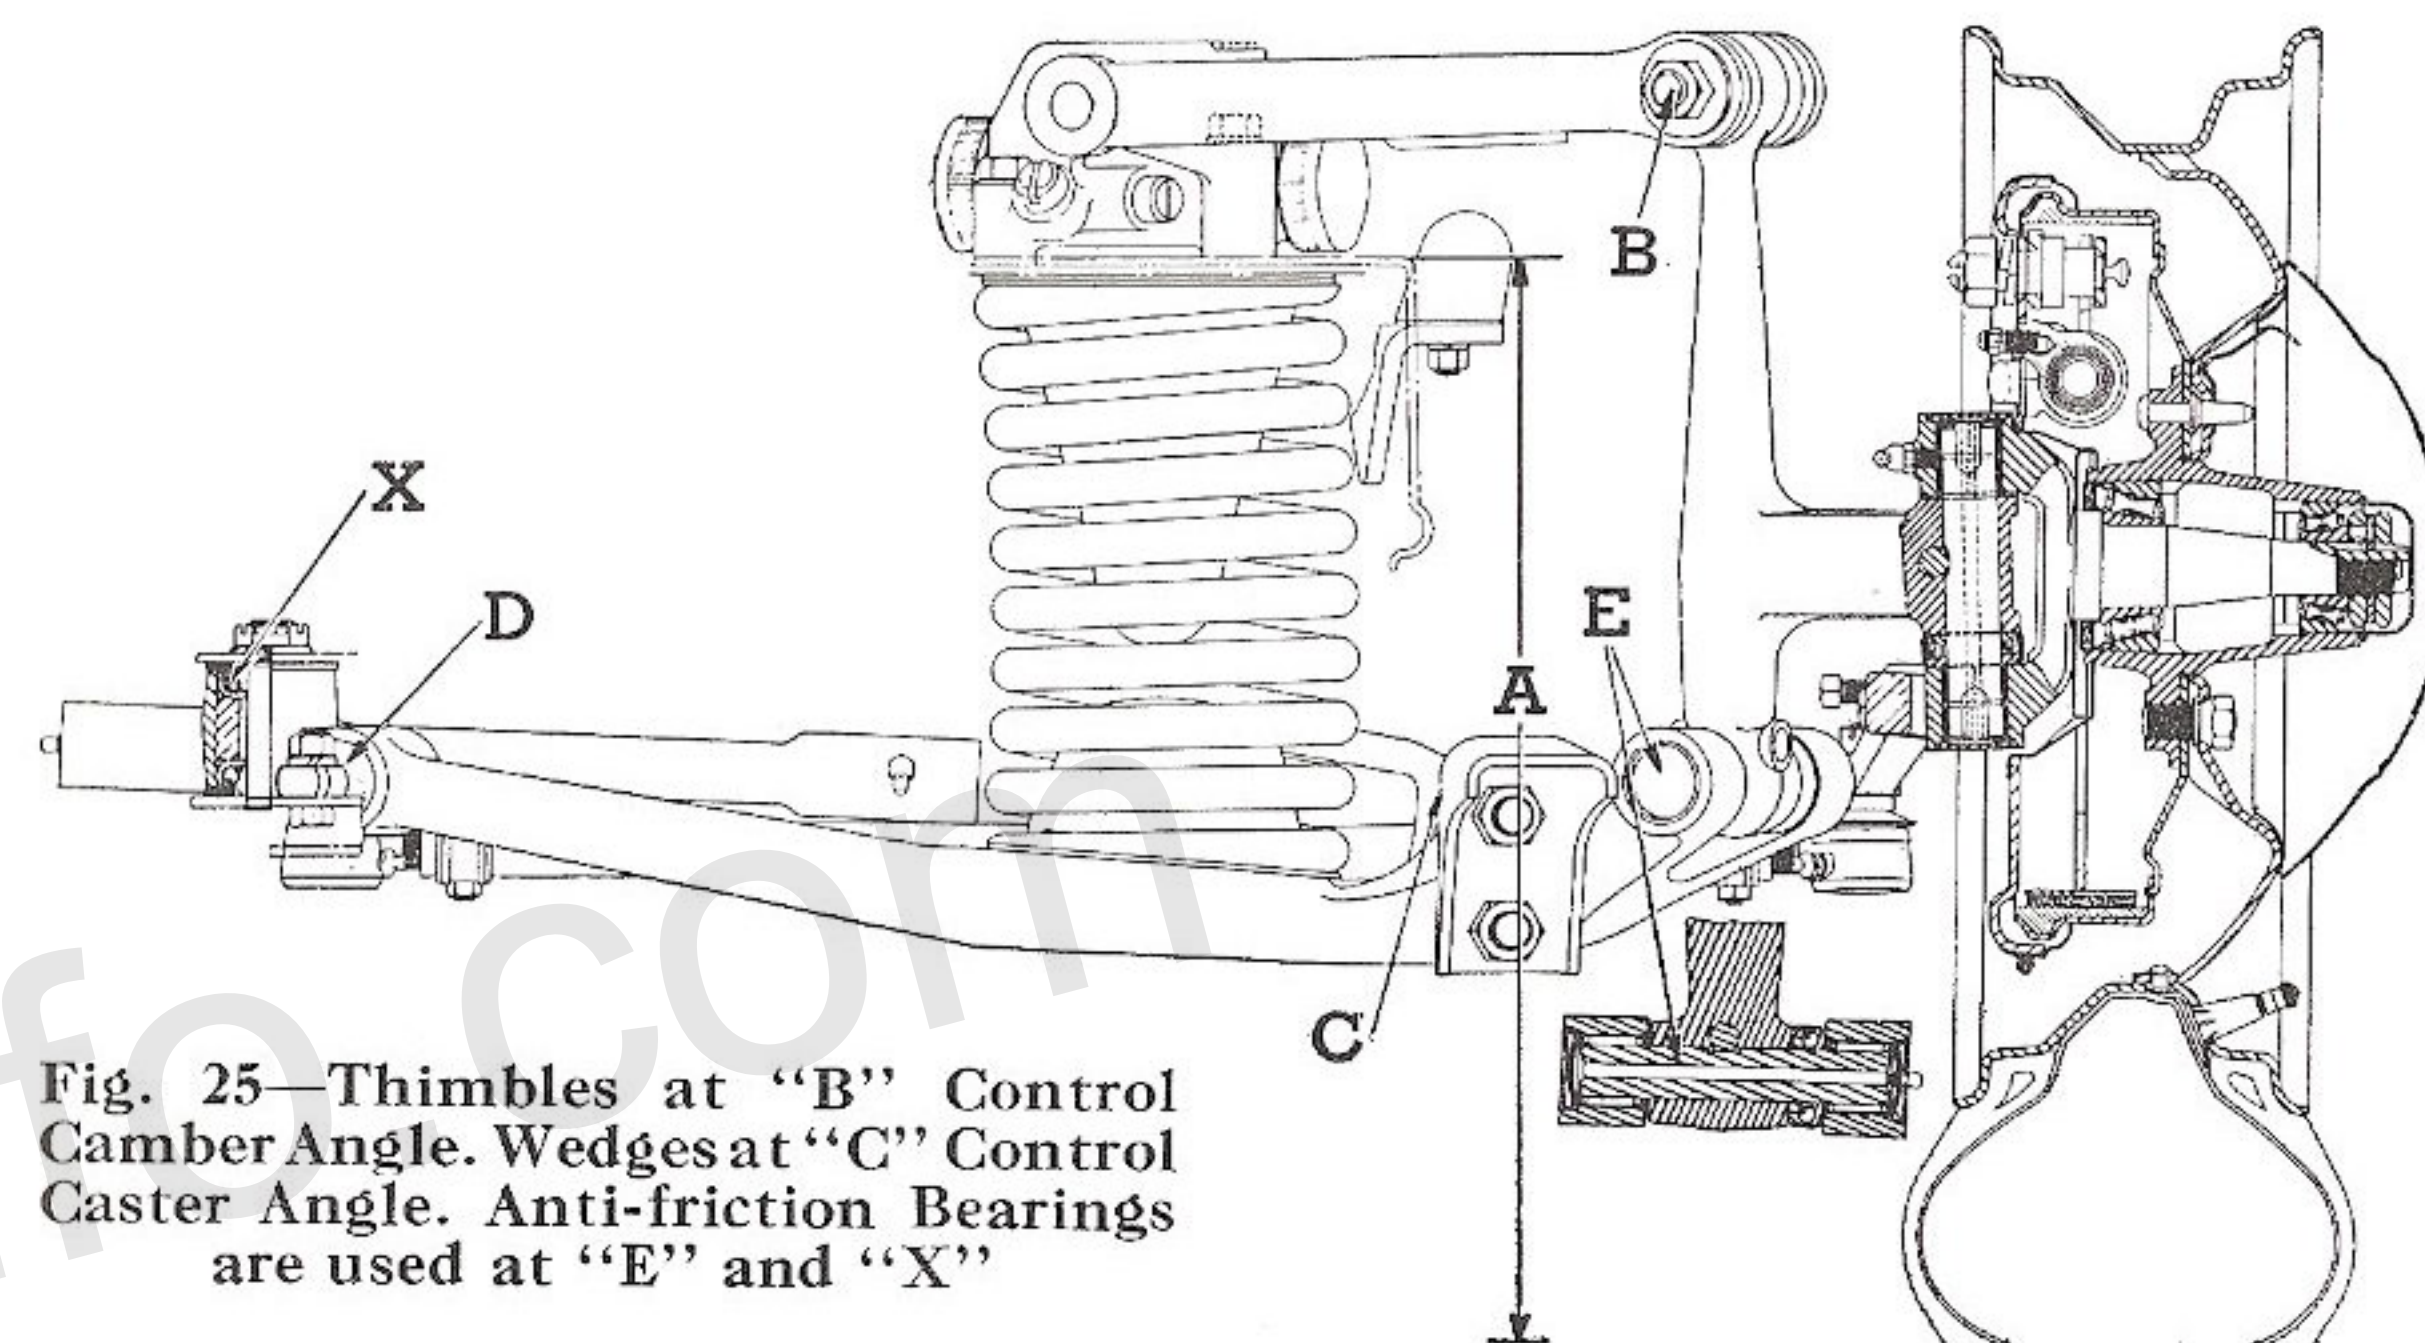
Thimbles at "B" Control Camber Angle. Wedges at "C" Control Caster Angle. Anti-friction Bearings are used at "E" and "X"
